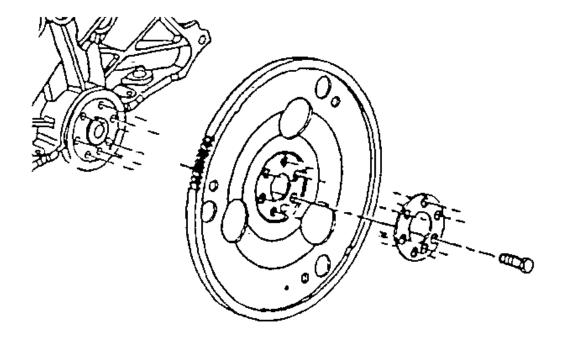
Identifying Engine Flywheel & Components Courtesy of GENERAL MOTORS CORP.
